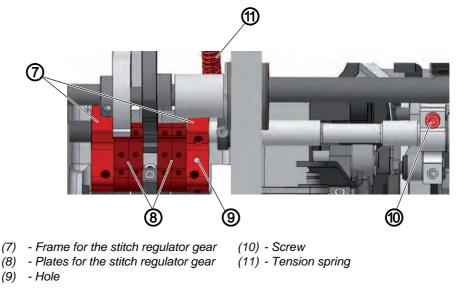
Adjusting the stitch length adjusting wheel (2)
